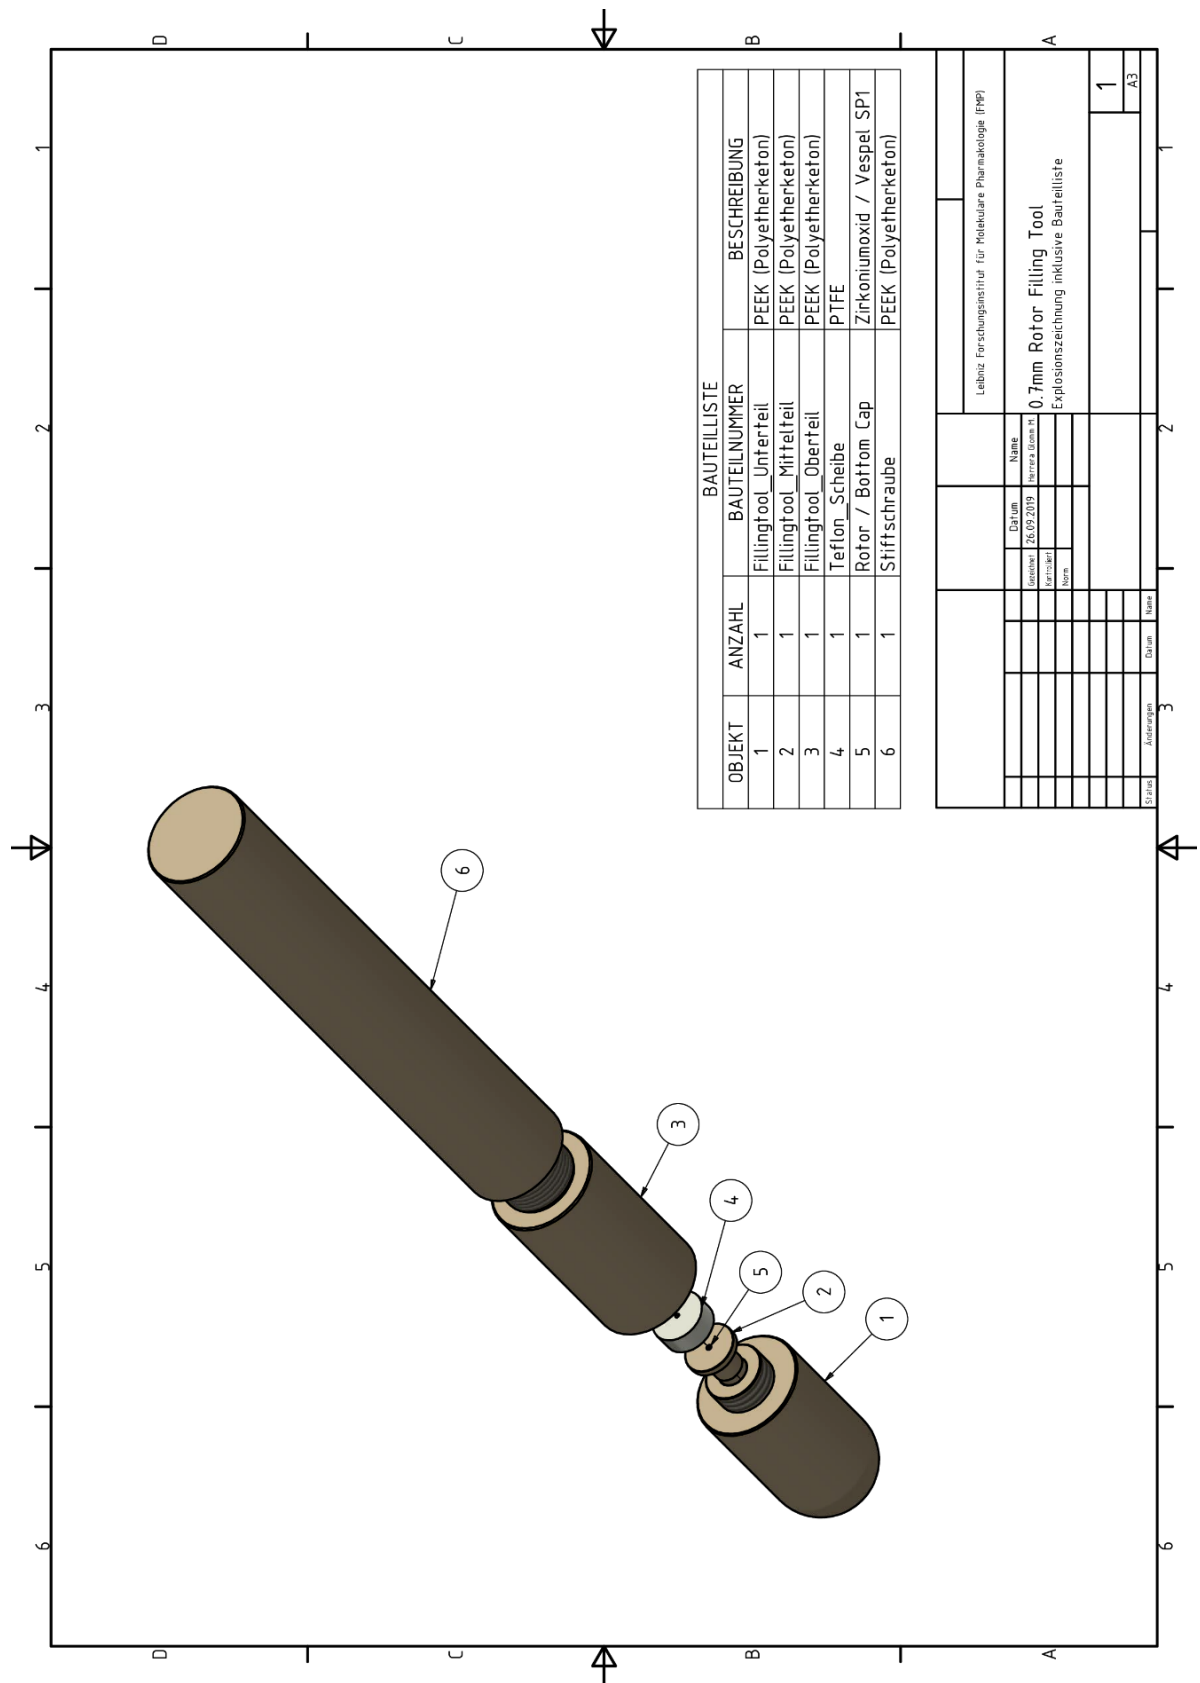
Technical drawing of the 0.7mm filling tool, overview.
